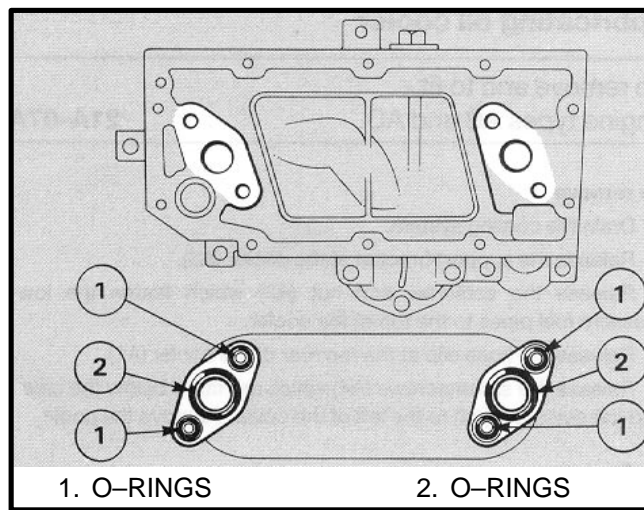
JOINTS FOR THE COOLER ELEMENT, ENGINE AB
